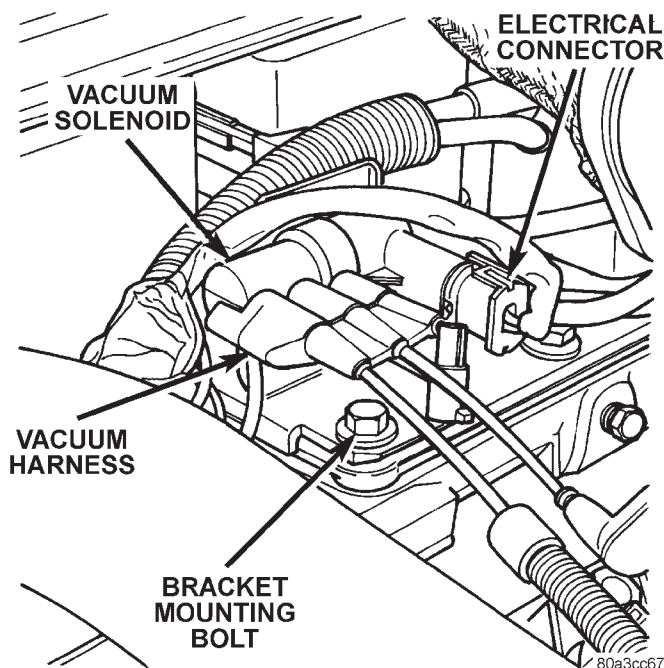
EGR Valve Vacuum Regulator Solenoid
